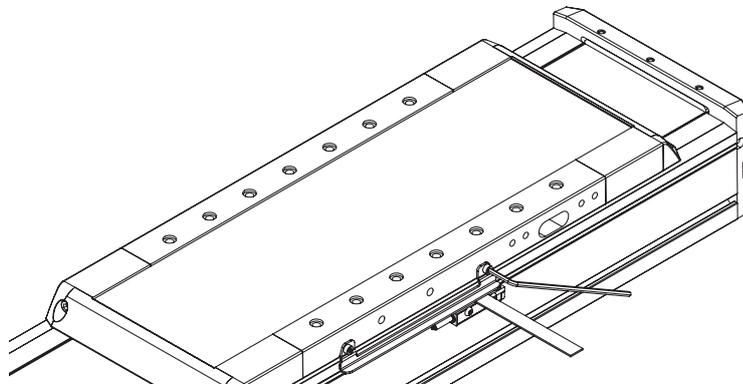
Setting the switching distance with a feeler gauge, and tightening the bolts
